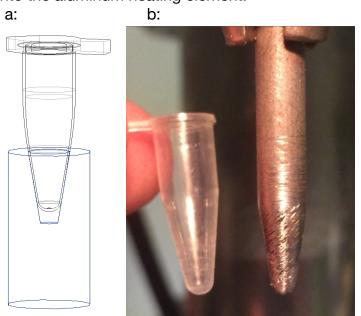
a: Detail of the heating element and PCR tube contact. b: Shaping tool used to bore conical hole in the heating element.
